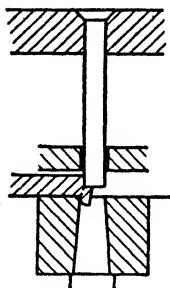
In cutting part blanks, delicate punches deflect and chip or wear against the die edges.
